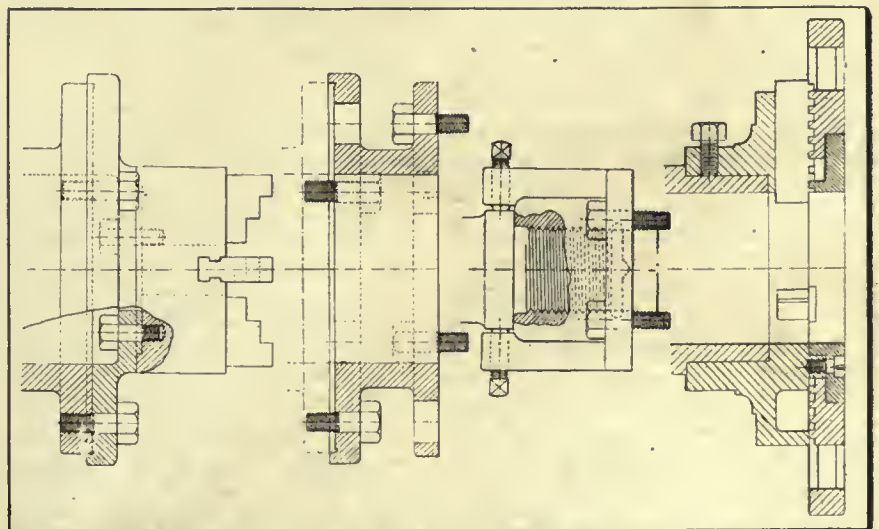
FIG. 12. FIG. 13. FIG. 14. TYPICAL METHODS OF ATTACHING CHUCKS TO LATHE SPINDLES.
